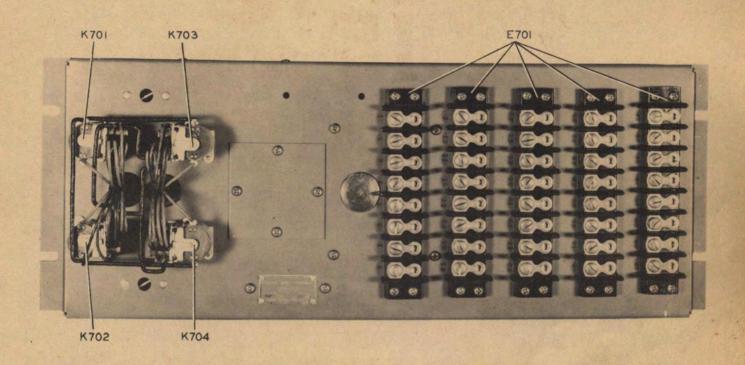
Type 274D Relay Control Unit, Parts Arrangement
